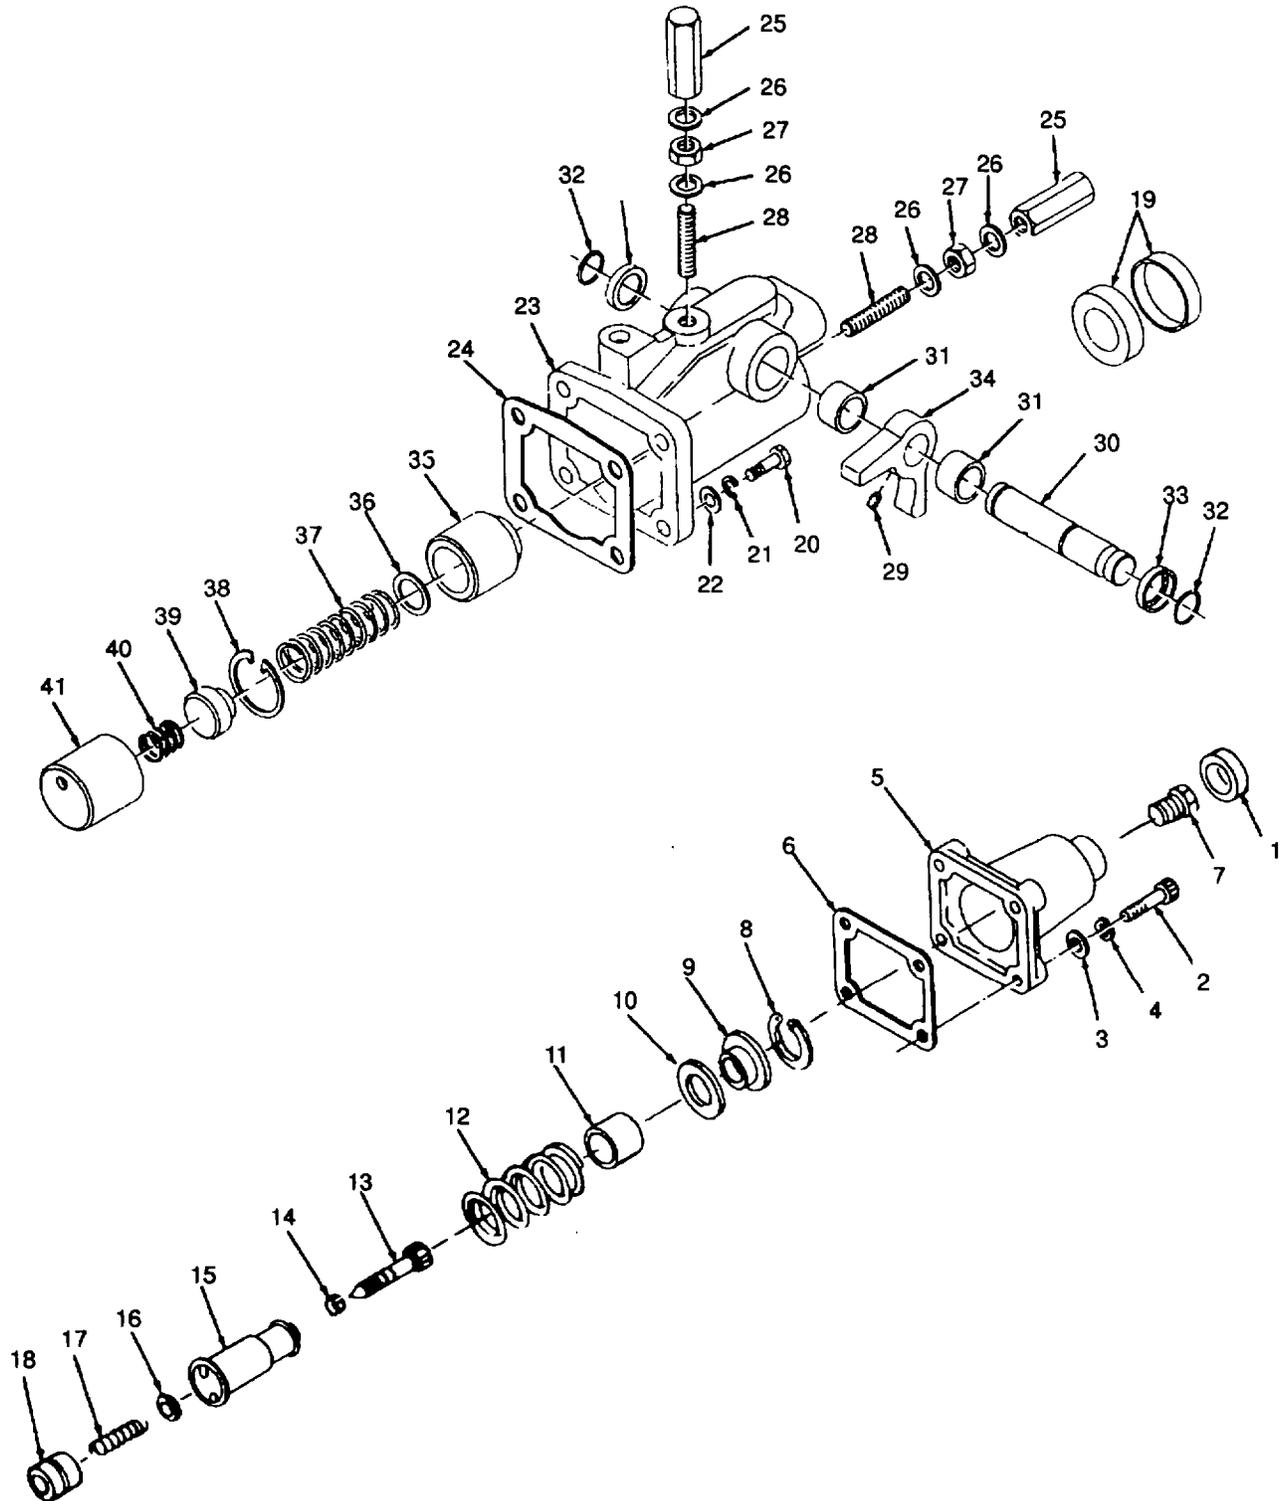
Fuel Injection Pump Housing and Related Parts, Exploded view (Sheet 2 of 3)
